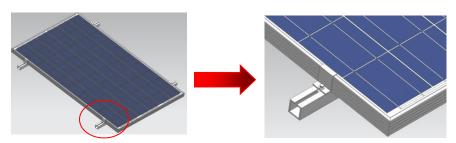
Schematic diagram of long side pressing block We advise users to use an installation method as shown in the two pictures above, as this method renders modules connection rather fast. Installation method with clamping on the short side of the frame as below:
